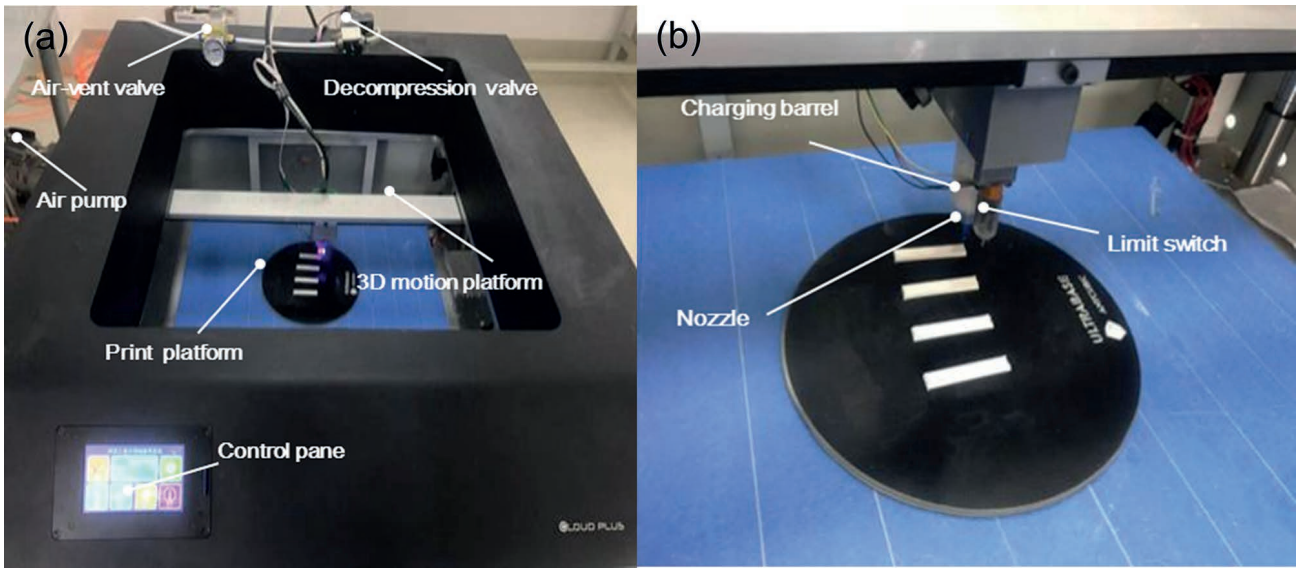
Ceramic 3D printing machine: (a) overall view of ceramic 3D printer, (b) zoomed-in view of nozzle.
